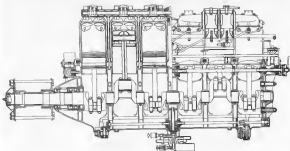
LONGITUDINAL SECTION OF THE FIAT 600 H.P. ENGINE
